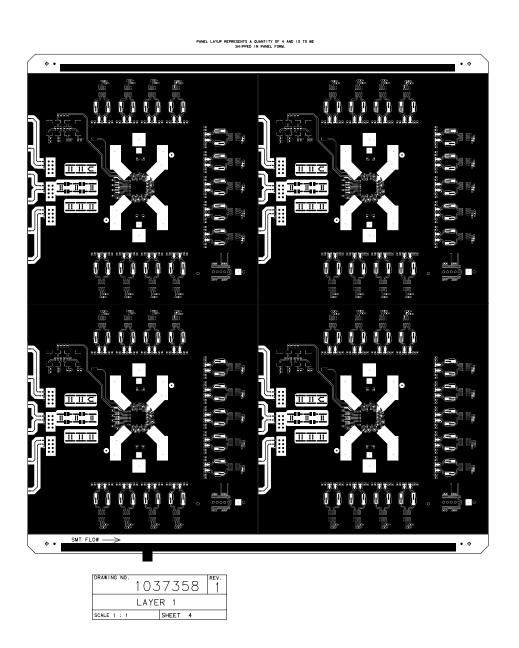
High speed dual channel 6-bit ADC test fixture DIB Layer 1: artwork for ADC testing fixture component pads and socket foot-prints
